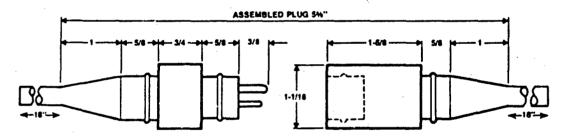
Crouse-Hinds Elector Water-Proof Connectors to provide positive retention.
